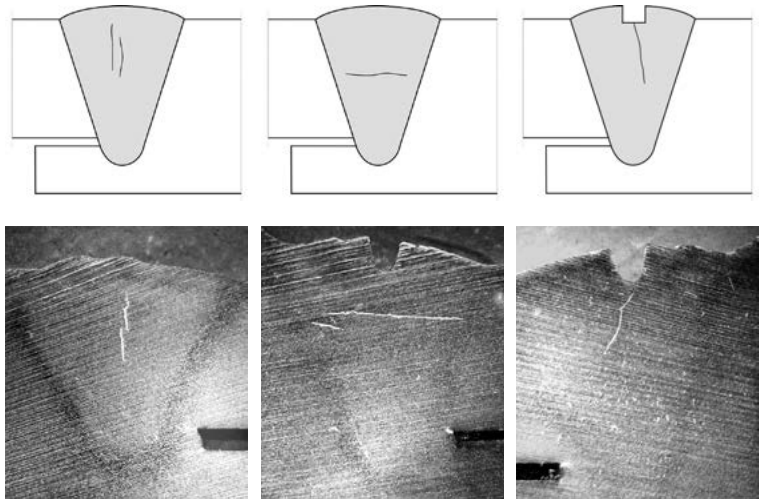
Cracks along the weld – longitudinal cracks (perpendicular to radial cracks)
